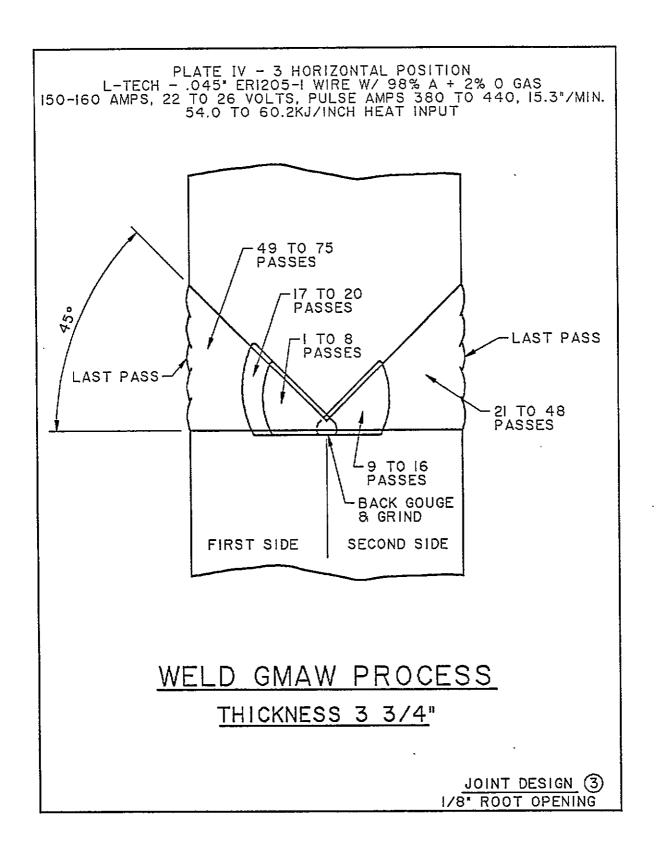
Metal Arc Weld Test Assembly for 3-3/4-Inch Thick 100 ksi Yield Strength Steel Plate
